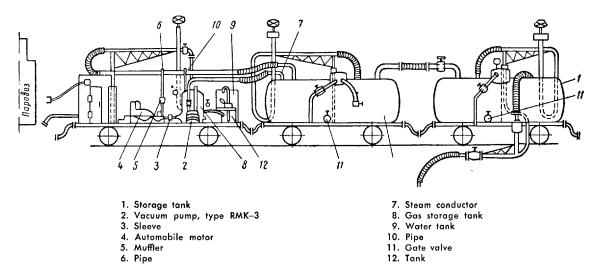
Main parts of a mobile unit used to vacuum-clean tank cars. This unit is mounted on three two-axle cars, one of which is a boxcar and two of which are flatcars.
